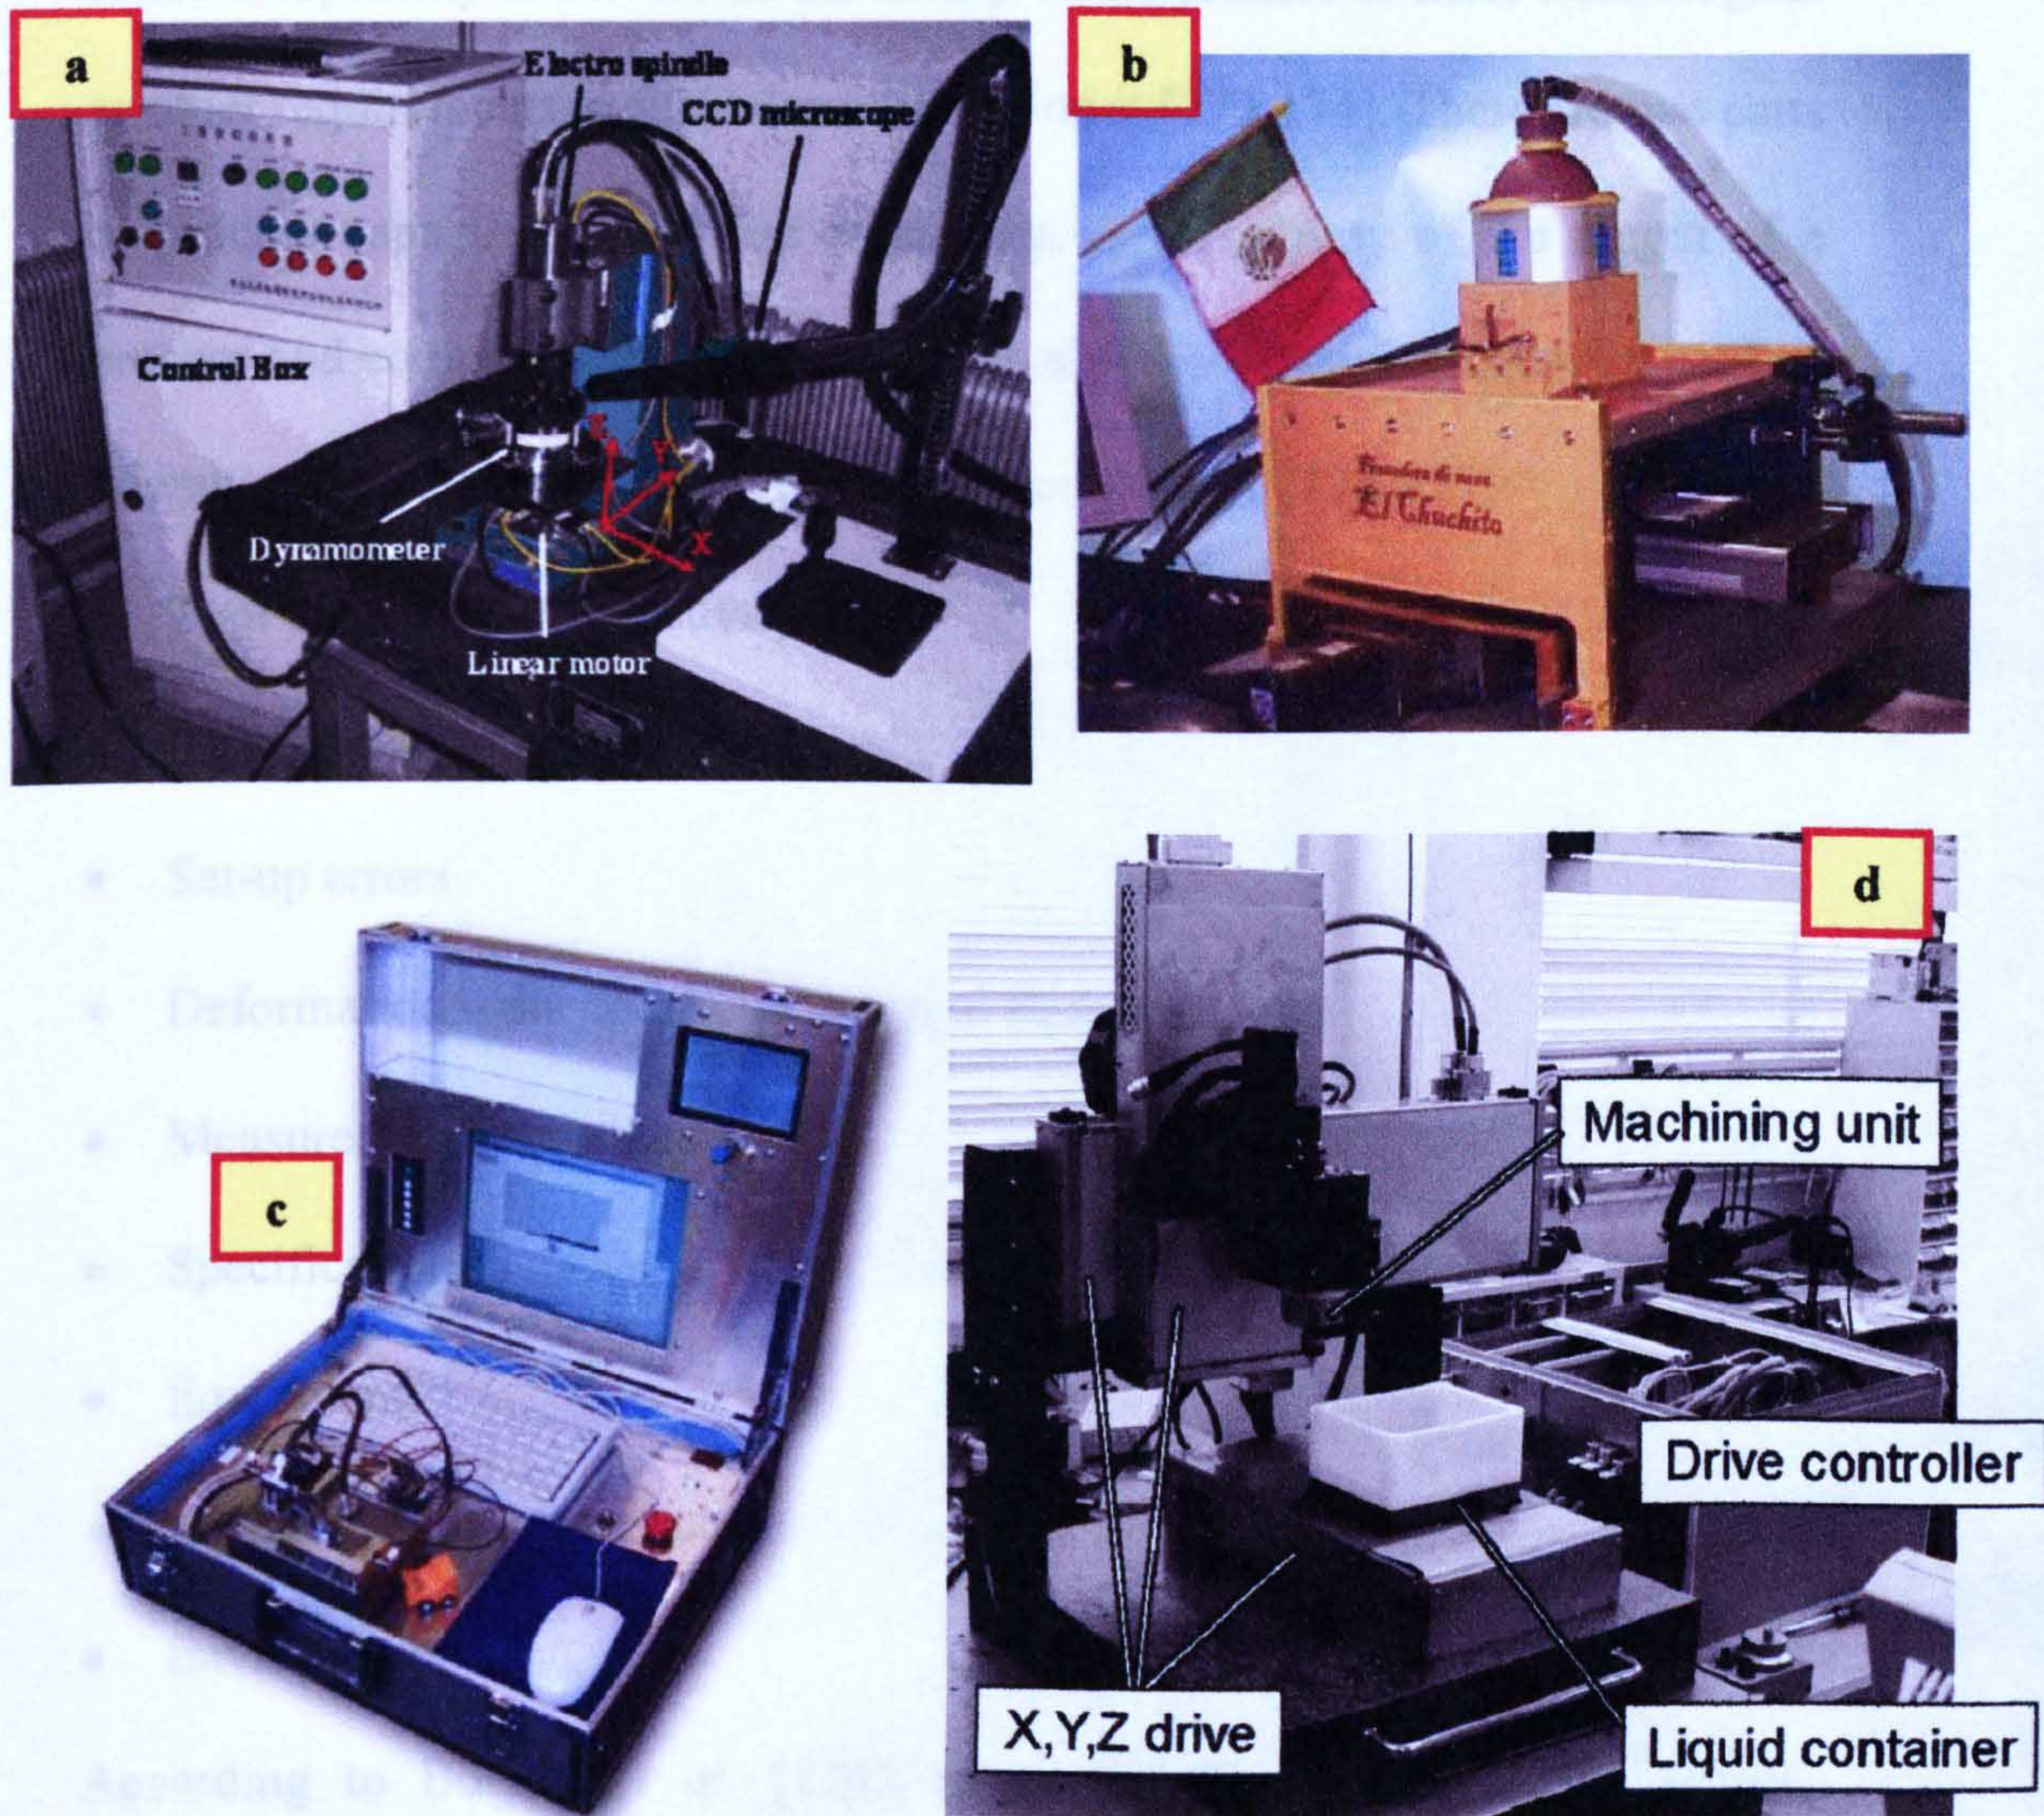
Example of MMT: (a) 3-axis MMT [161]; (b) 3-axis Desktop micro-milling machine [146]; (c) Micro-turning machine [167] (d) 3-axis Hybrid MMT [145]
